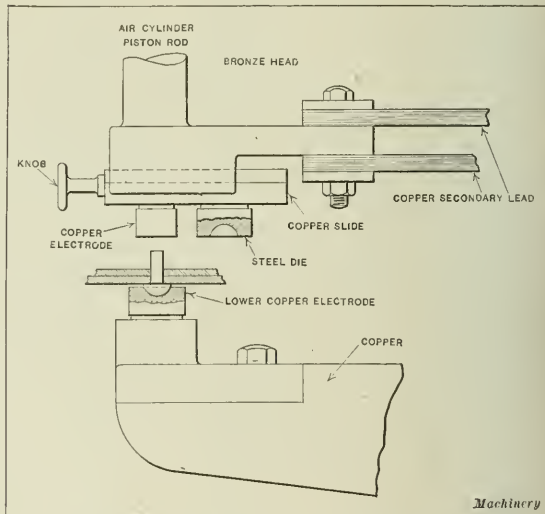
Method of upsetting Rivets over  $\frac{3}{8}$  Inch Diameter, using Copper Electrodes for heating and Steel Die for upsetting
